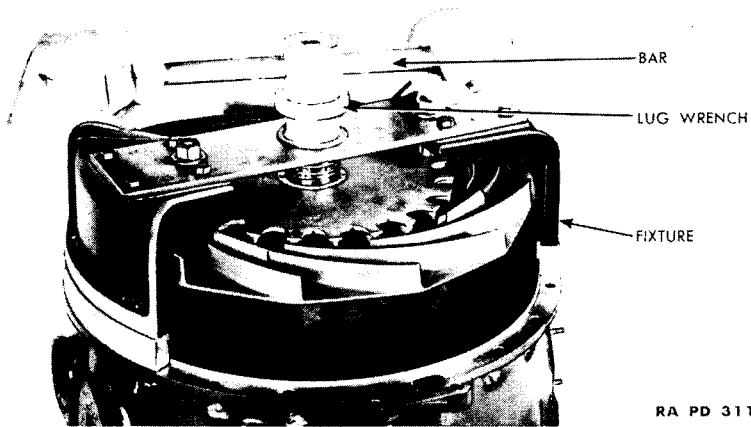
Removing Impeller Nut, Using Fixture 5A2170 and Wrench 5A2264
